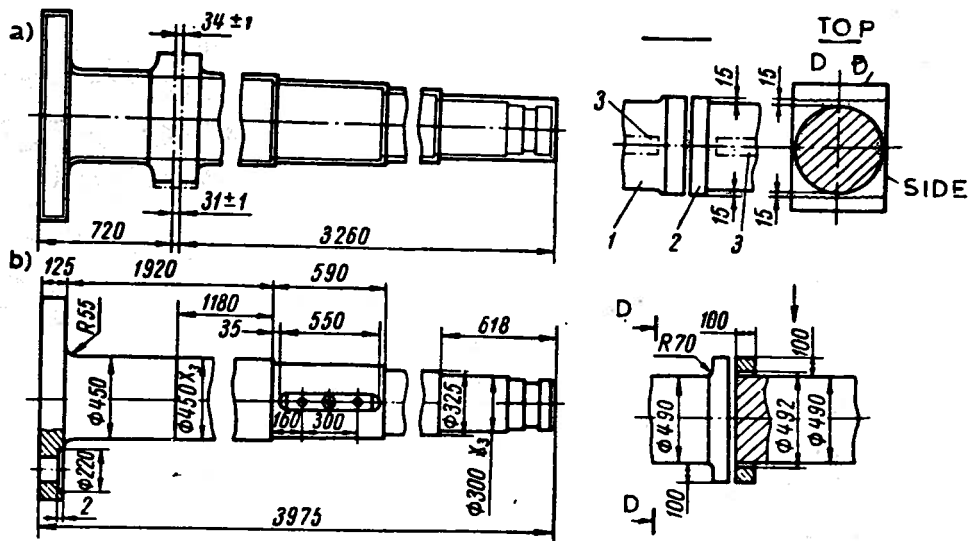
Rudder stock which is cast, forged and welded.
